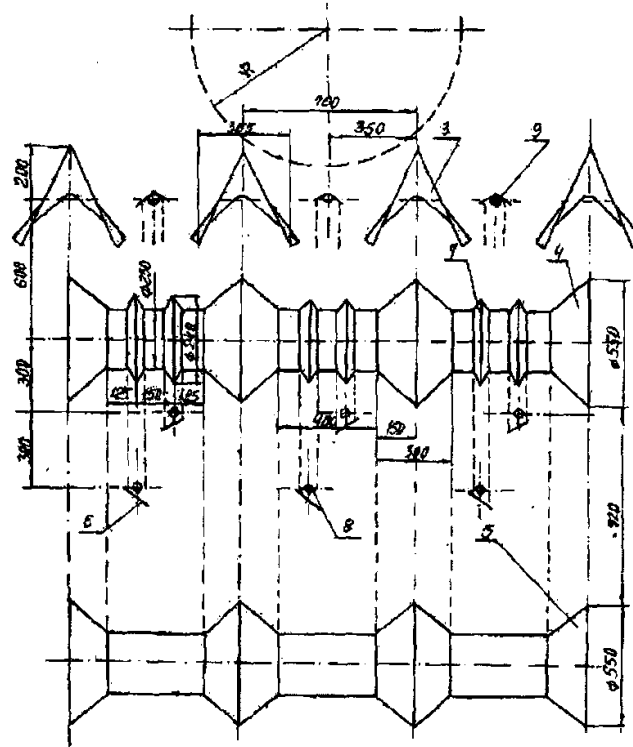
Scheme of the arrangement of the working elements of the comb-forming machine in plan
